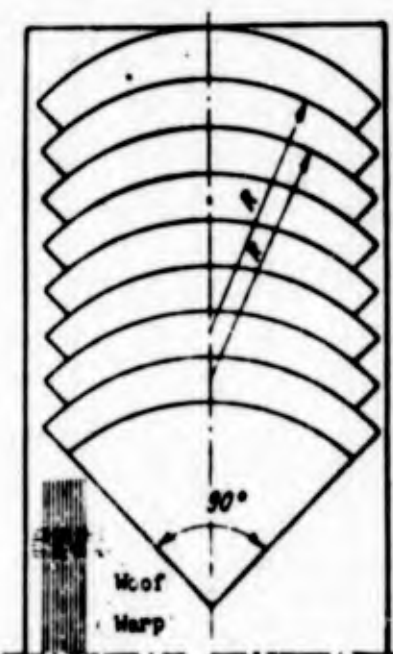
Layout of bakelized fabric in segments for pressing of gear blank.
